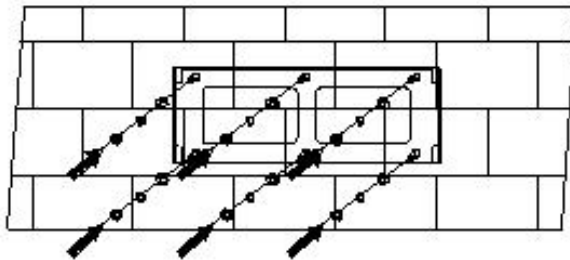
Fixing and Locking the Wall-mounting Bracket
